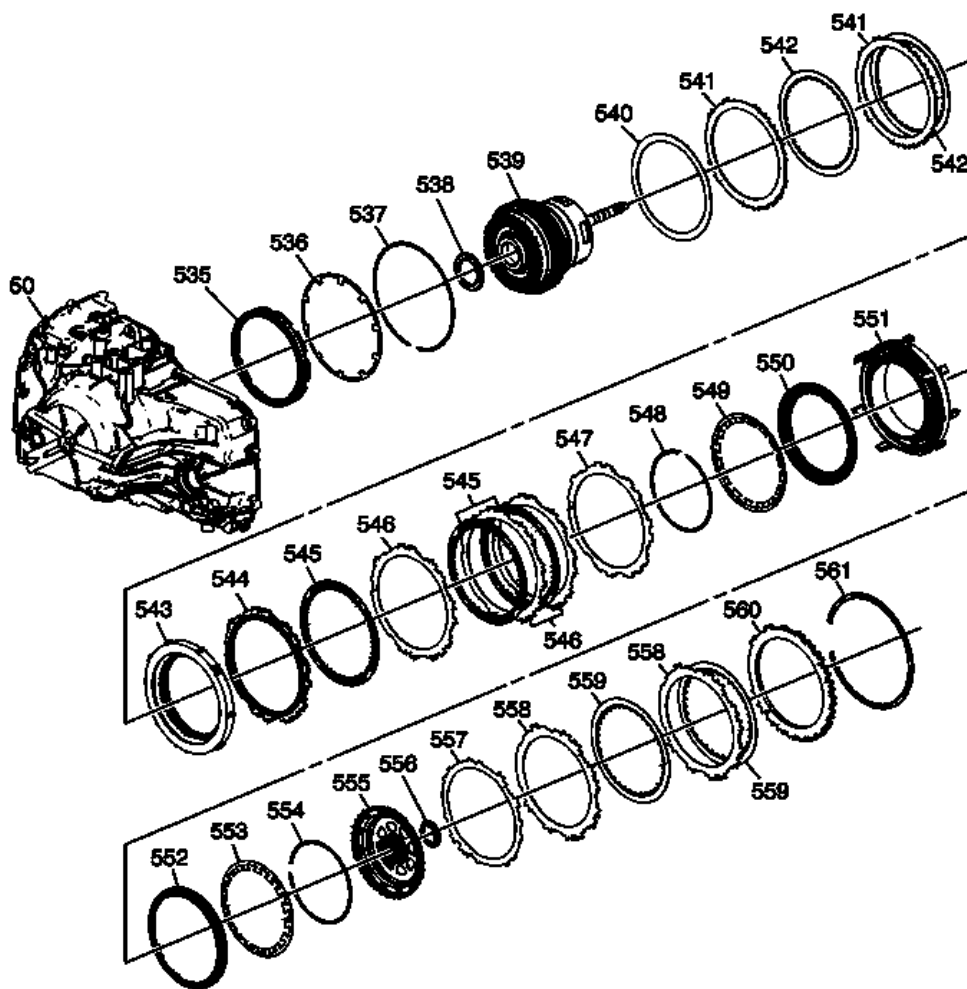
Disassembled View Of 2-6, Low 7 Reverse & 1-2-3-4 Clutch Plate Assemblies
